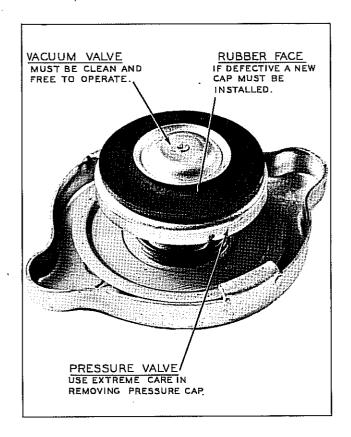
Pressure Cap Gasket, Valve and Valve Gasket
